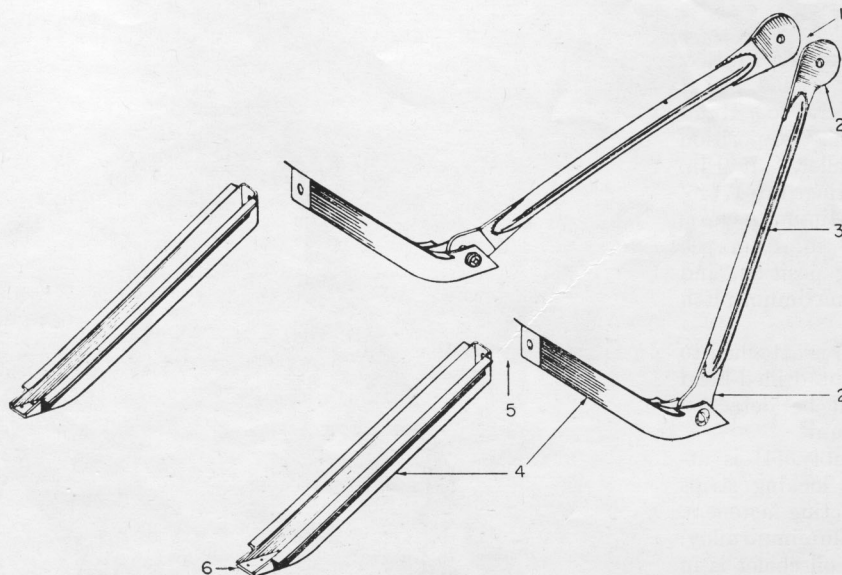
The simple and sturdy mount for the Seabee's 215-hp Franklin engine: (1) position of the rubber shock mount at the rear (propeller end) of the engine; (2) welded fitting; (3) supporting tube; (4) supporting hat section; (5) position of forward rubber shock mount (on crankcase); (6) forward attachment point to the fire wall and wing cross tie. The mount components are interchangeable for use on either side of the engine.
